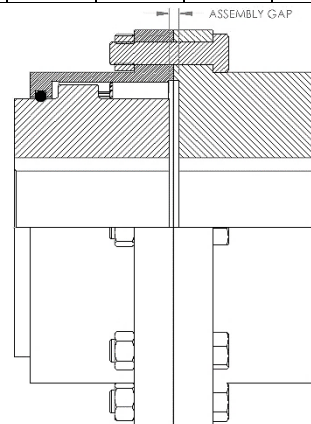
SINGLE FLEX ASSEMBLY GAP
